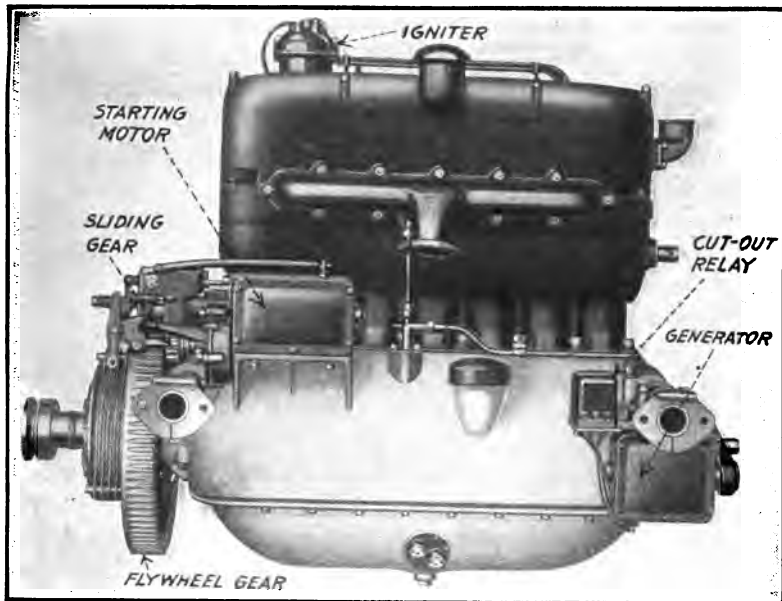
Chalmers Engine Showing Location of Gray & Davis Starting Motor, Generator and Cutout Relay.
